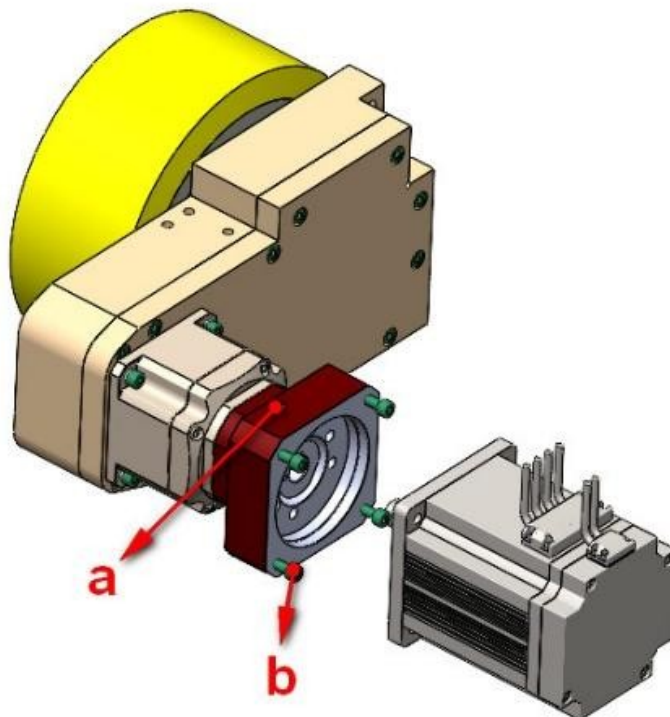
Motor removal: shaft locking screw at a and four motor fixing screws at b.
